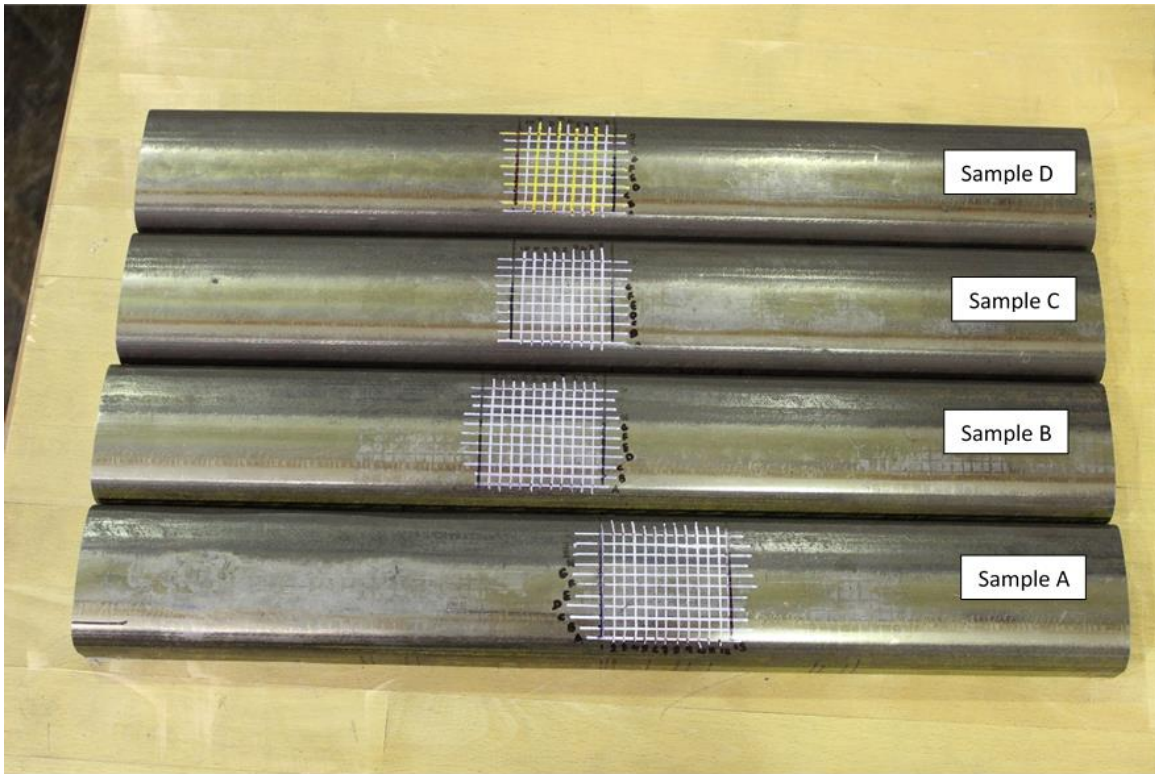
Four samples have been selected and machined 30mm from the railhead surface and section to a length of 500mm for bending test.
